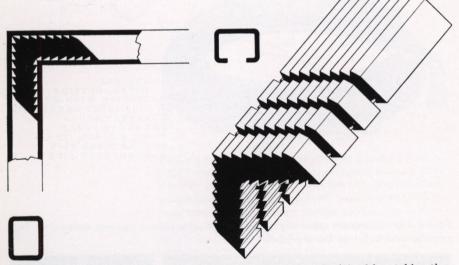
Extruded aluminum window-frame sections can be joined by staking them to serrated corner section, cut from aluminum extrusion of staked joint as shown.
